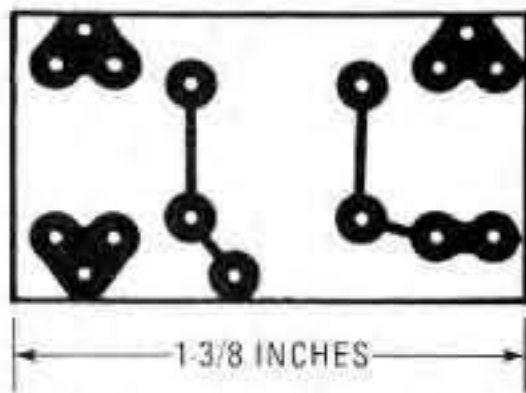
WHEN YOU MAKE THIS BOARD, be sure that pads do not touch rectangular border.
